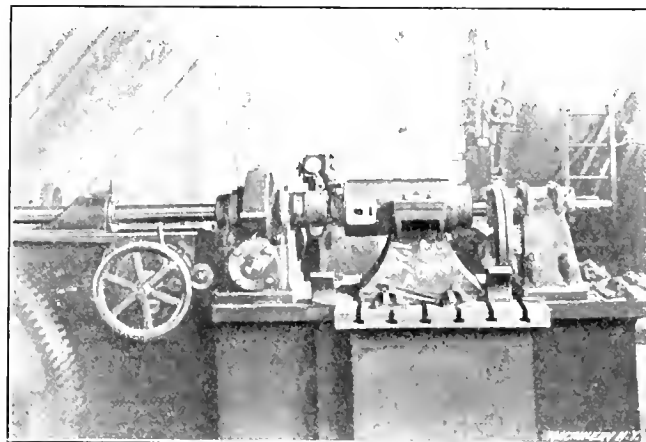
Rough Boring a Cylinder on a Horizontal Machine
